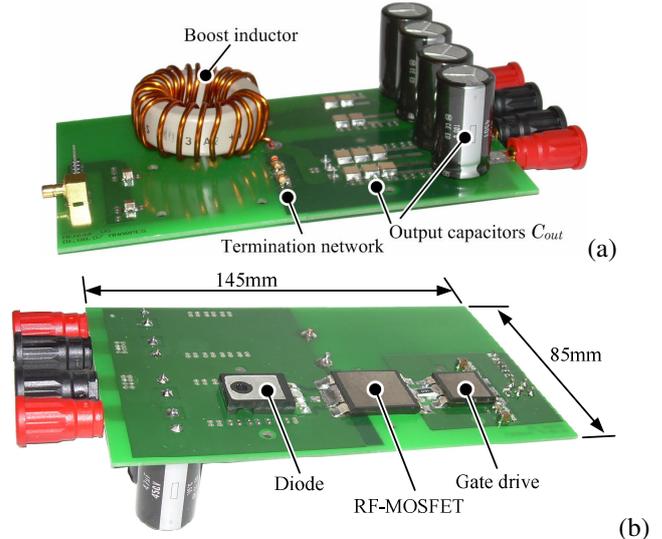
Realized prototype of the boost circuit with PCB board wiring including a damping layer with optimized termination network. (a) TOP view and (b) BOTTOM view of the prototype which can directly be mounted on a heatsink.
